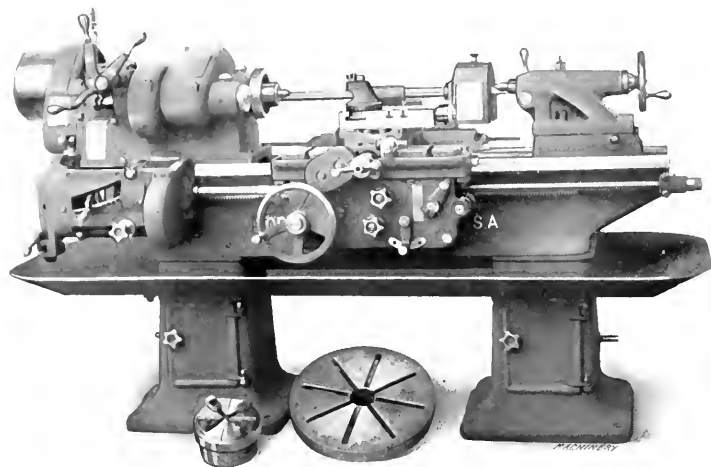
Lodge & Shipley Universal Tool-room Lathe with "Selective Head"
